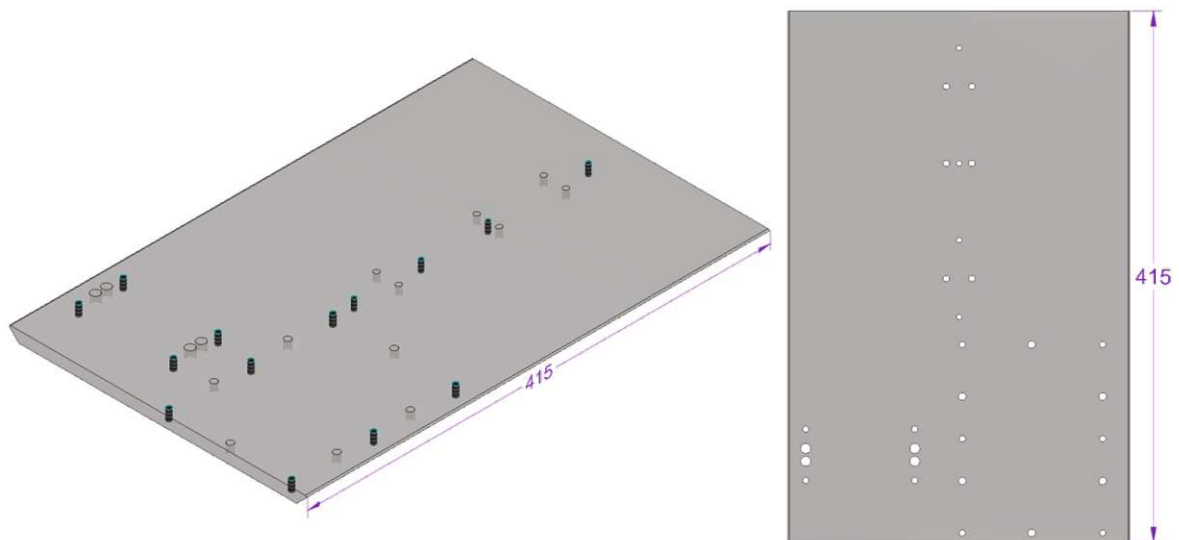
CAD render of the OS plate with length measurement in mm for scale, in isometric view (left) and top view (right).
